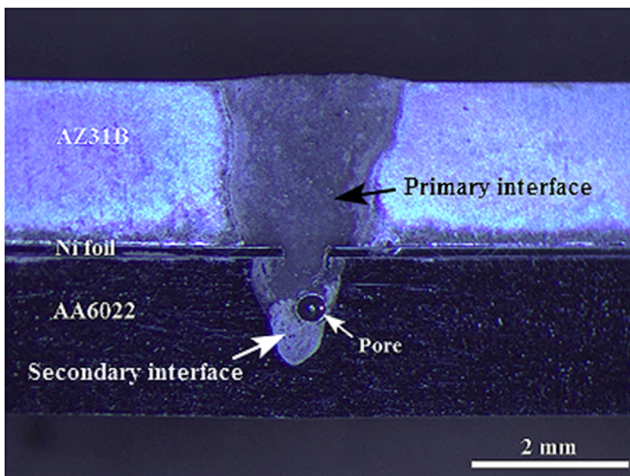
Cross sectional macrograph of the laser welded sample
